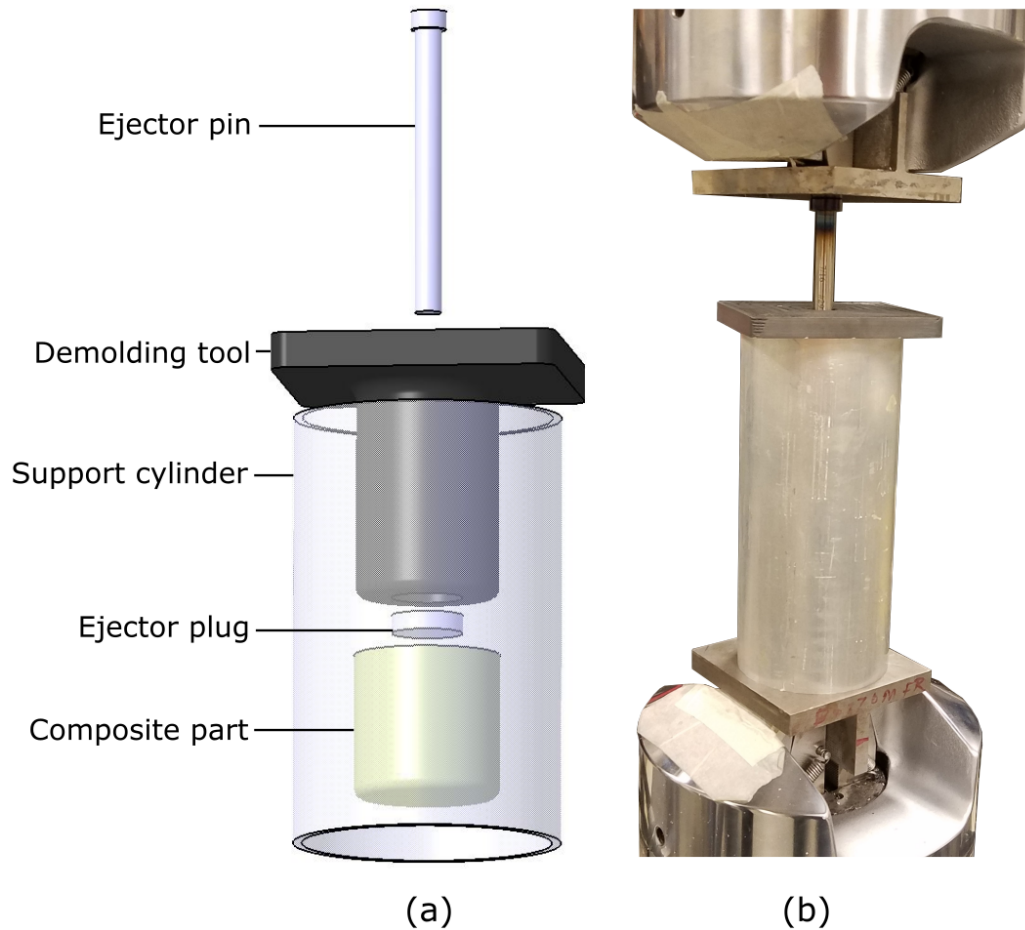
(a) Schematic drawing of the demolding test setting and (b) the demolding test setting in the MTS system.
